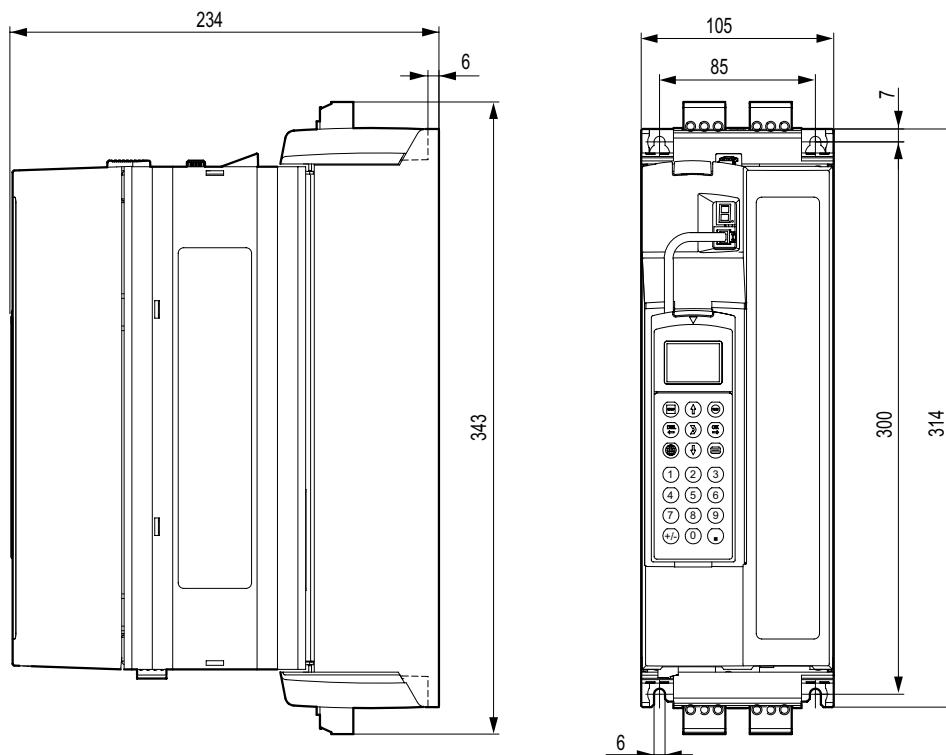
Dimension drawing for MDX61B size 0M, dimensions in mm
